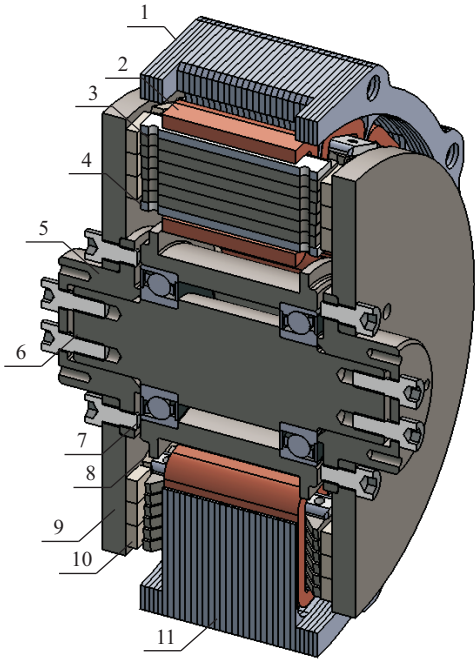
Cross section view of the YASA AFPMSM. (1) laminated stator housing, (2) concentrated winding, (3) laminated core with six different profile shapes, (4) plastic end winding plate, (5) rotor adaptor, (6) shaft, (7) bearing, (8) bearing block, (9) rotor disc back-iron, (10) segmented permanent magnet, (11) inward heat extraction fin.
